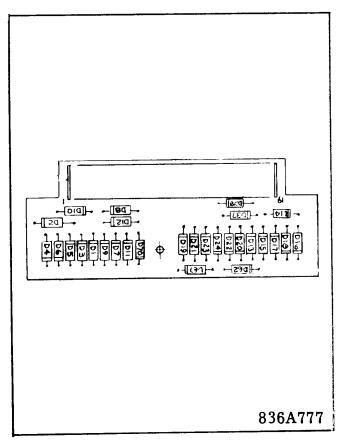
Printed Circuit Board Assembly for SDG, SDG-1, 2, 3, & 4 Relays
